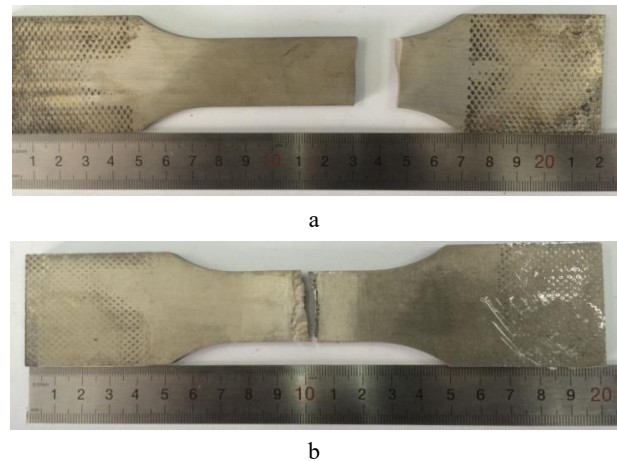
Fatigue crack initiation site, propagation direction and fracture site: a – the base metal; b – the welded joint
